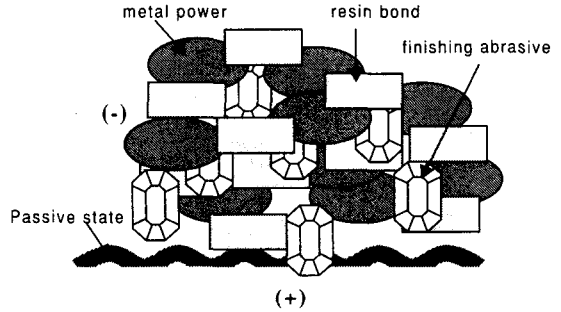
Electro-chemical grinding mechanism using metal-resin bonded pellet
